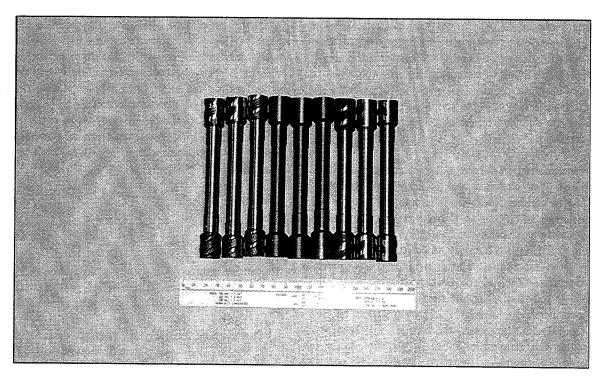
R1 test bars machined to 0.505-inch diameter.
